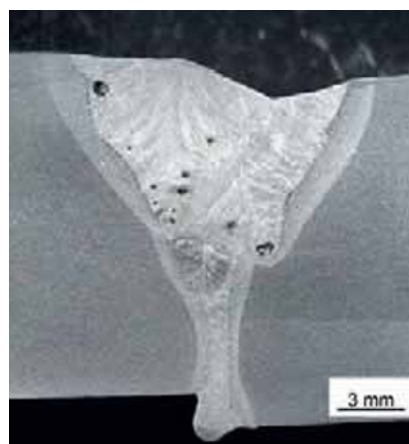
Cross-section of a hybrid welded sample with 0.5 mm gap and 1.5 mm linear misalignment
